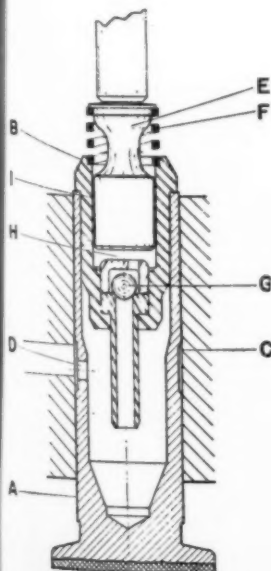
below shows increase of valve seating velocity with increased tappet clearance. Fig. 2 at left shows ordinary automotive type valve adjuster which compensates for valve gear expansion. Fig. 3 shows valve adjuster with "eccentric compensator."
